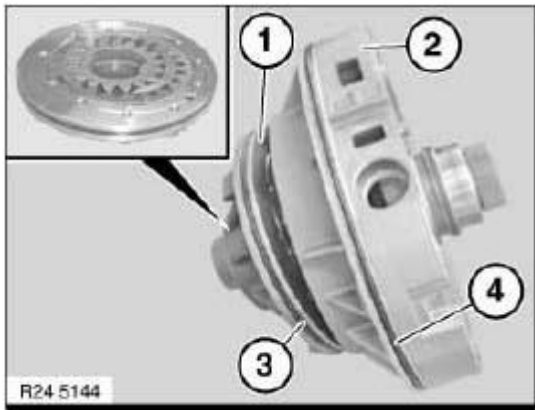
Identifying Cover And Pump Housing With O-Ring
